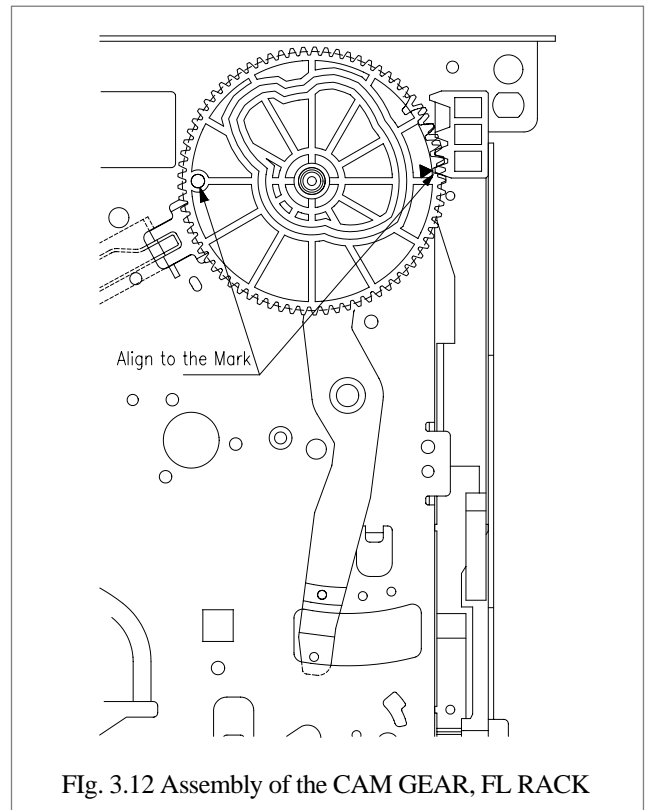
Assembly of the CAM GEAR, FL RACK
